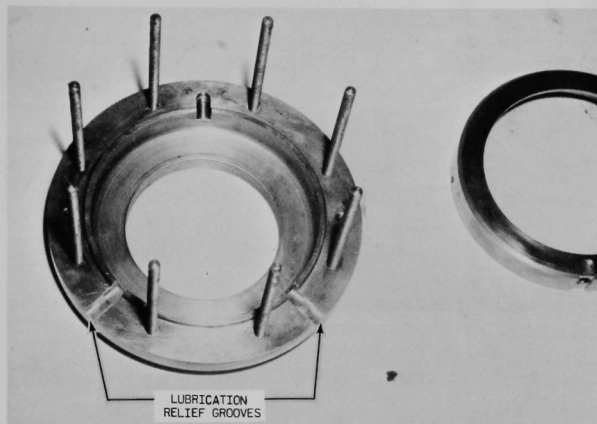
Modified Grease Retainer for Lower Bearing of Drive Motor. ANL Neg. No. 103-O5603A.
